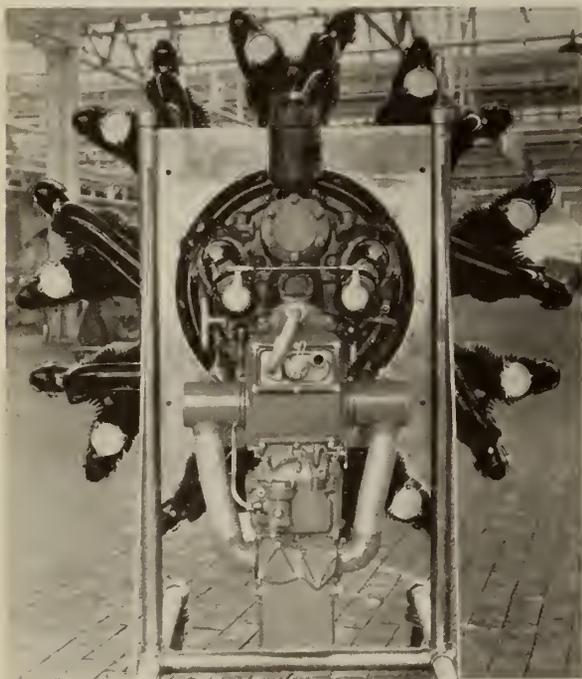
Hot Spot and Oil Temperature Regulator Assembled on Engine.
